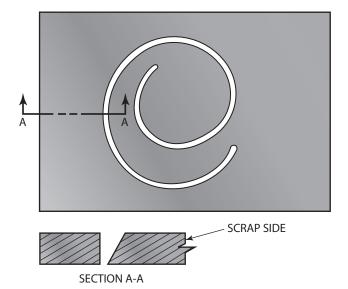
When cutting a hole, spiral the torch outward in a counterclockwise direction.
